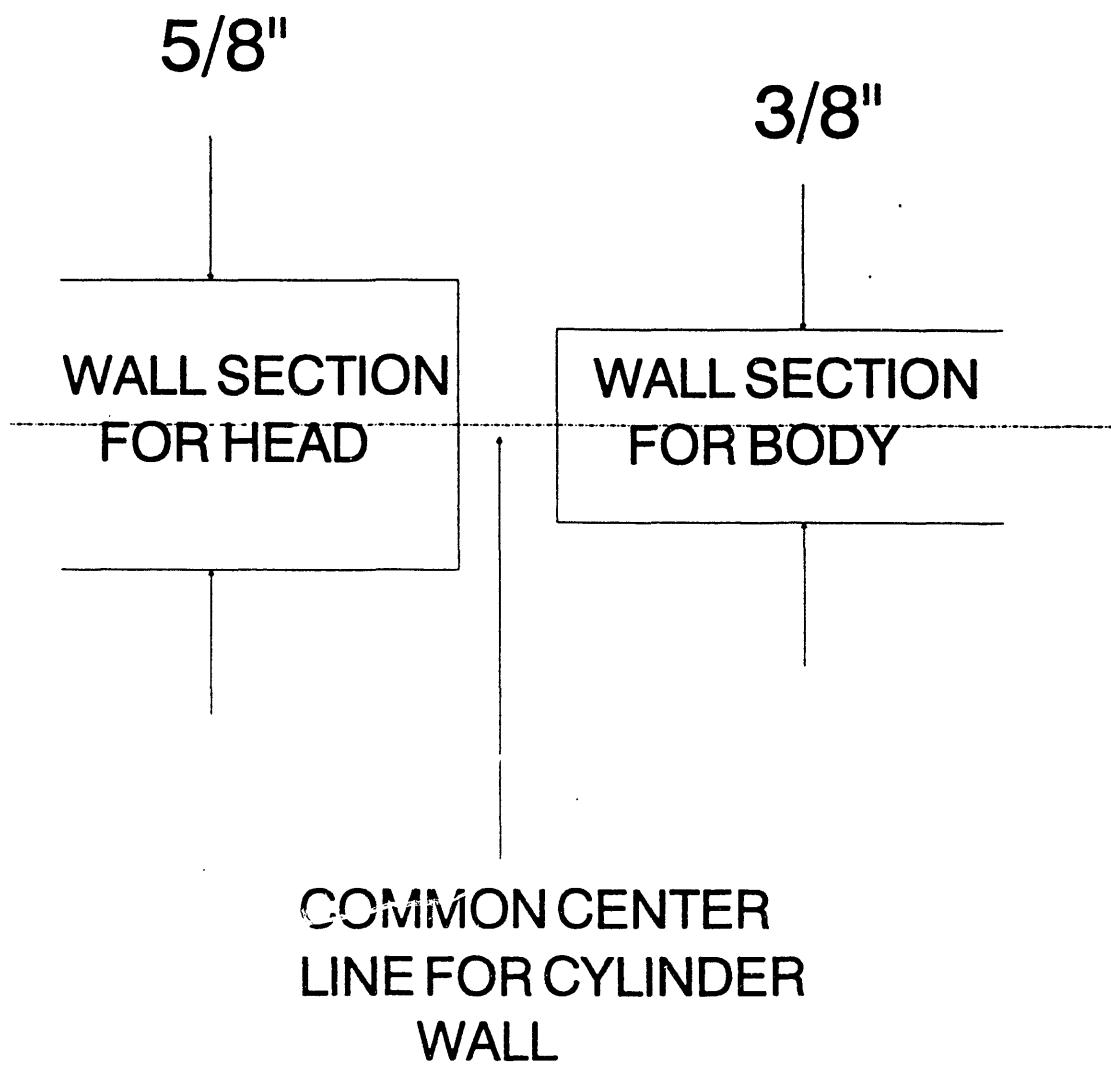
Sketch Showing Intent of How the Body Would Mate With the Head.
